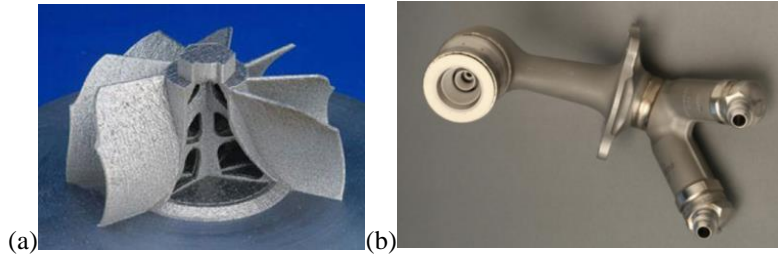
Examples of AM parts: impeller (a) [21] and fuel nozzle (b) [22].
